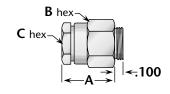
(Clamp type for flexible cable or solder-clamp for semi-rigid cable)
